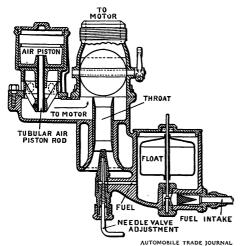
The 1908 Thomas Carburetor. This is a new design, and has an auxiliary air valve of the piston type without any springs. For complete description see text.
